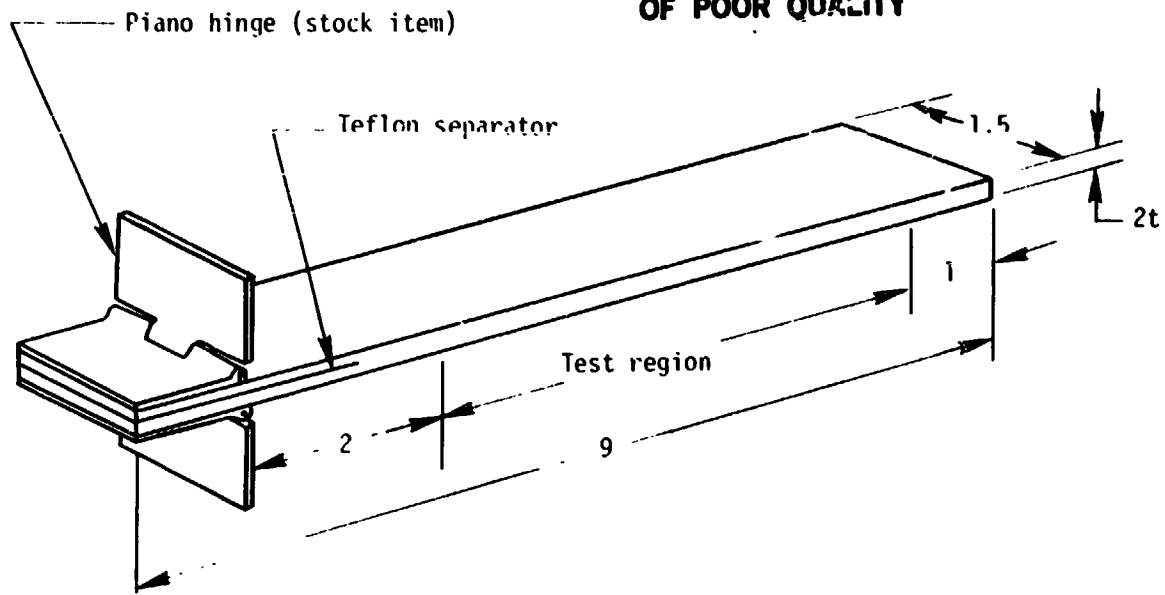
Hinged double cantilever beam (HDCB) specimen.
